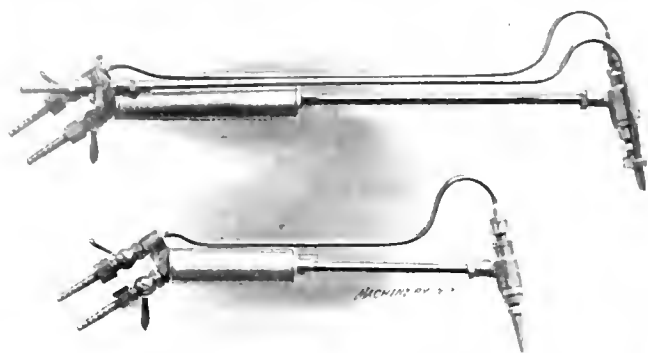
Davis-Bournonville Oxy-acetylene Cutting and Welding Torches.
